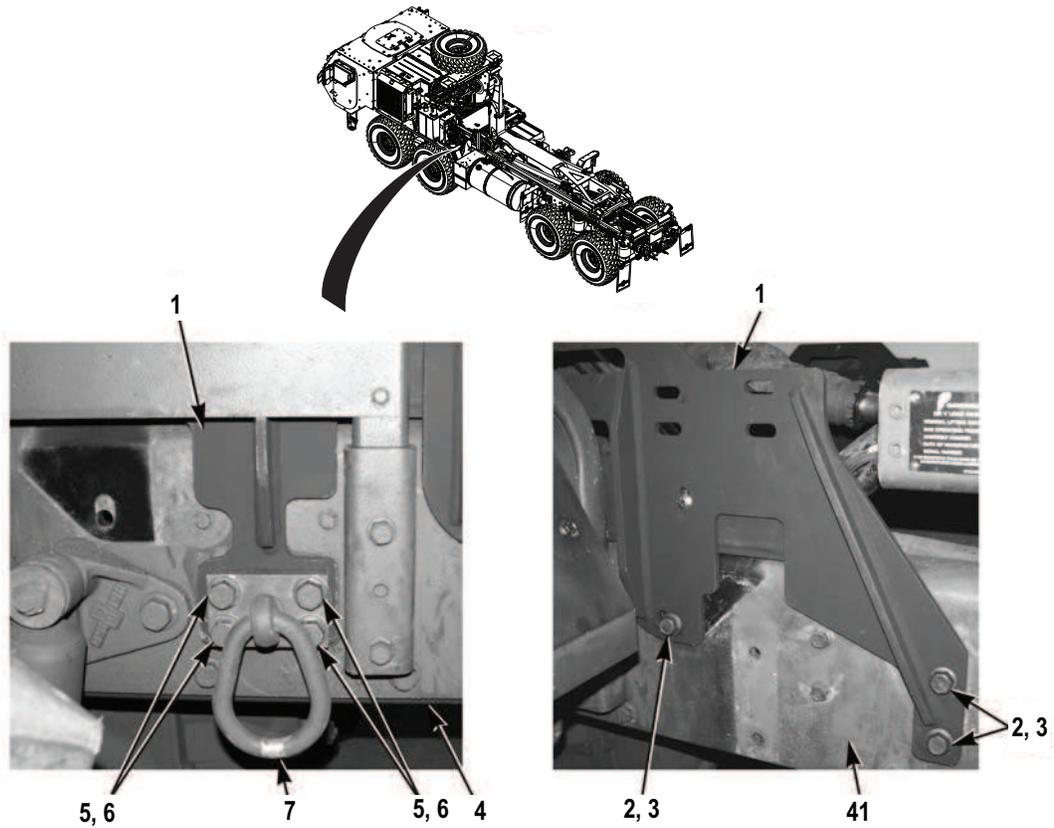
HEMTT A4 Driver Side Stowage Mounting Bracket.
